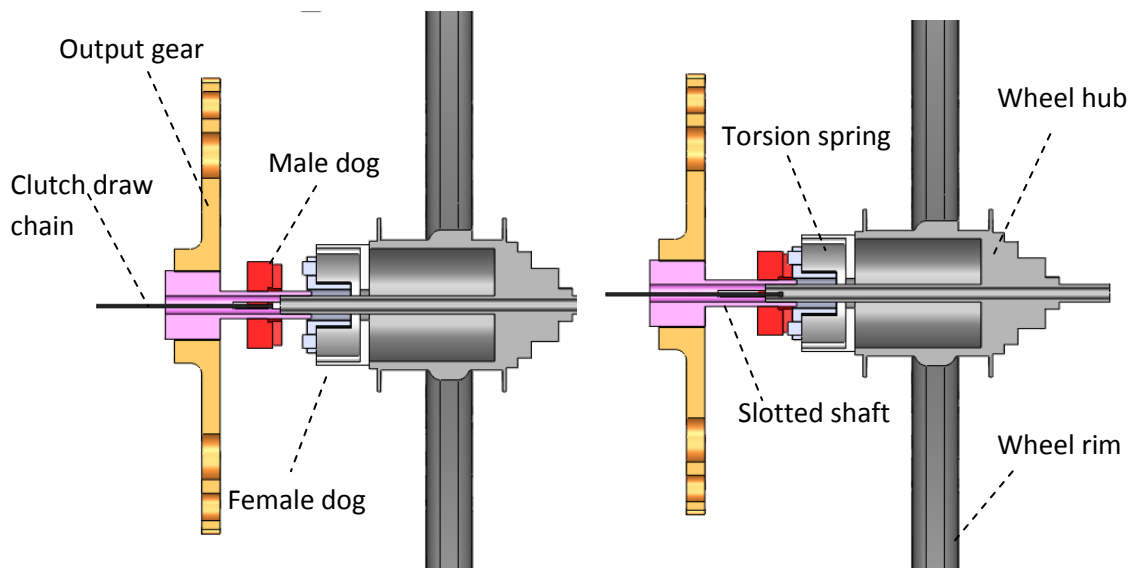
Exploded section view through 2013 driveline with clutch disengaged (left) and engaged (right)
